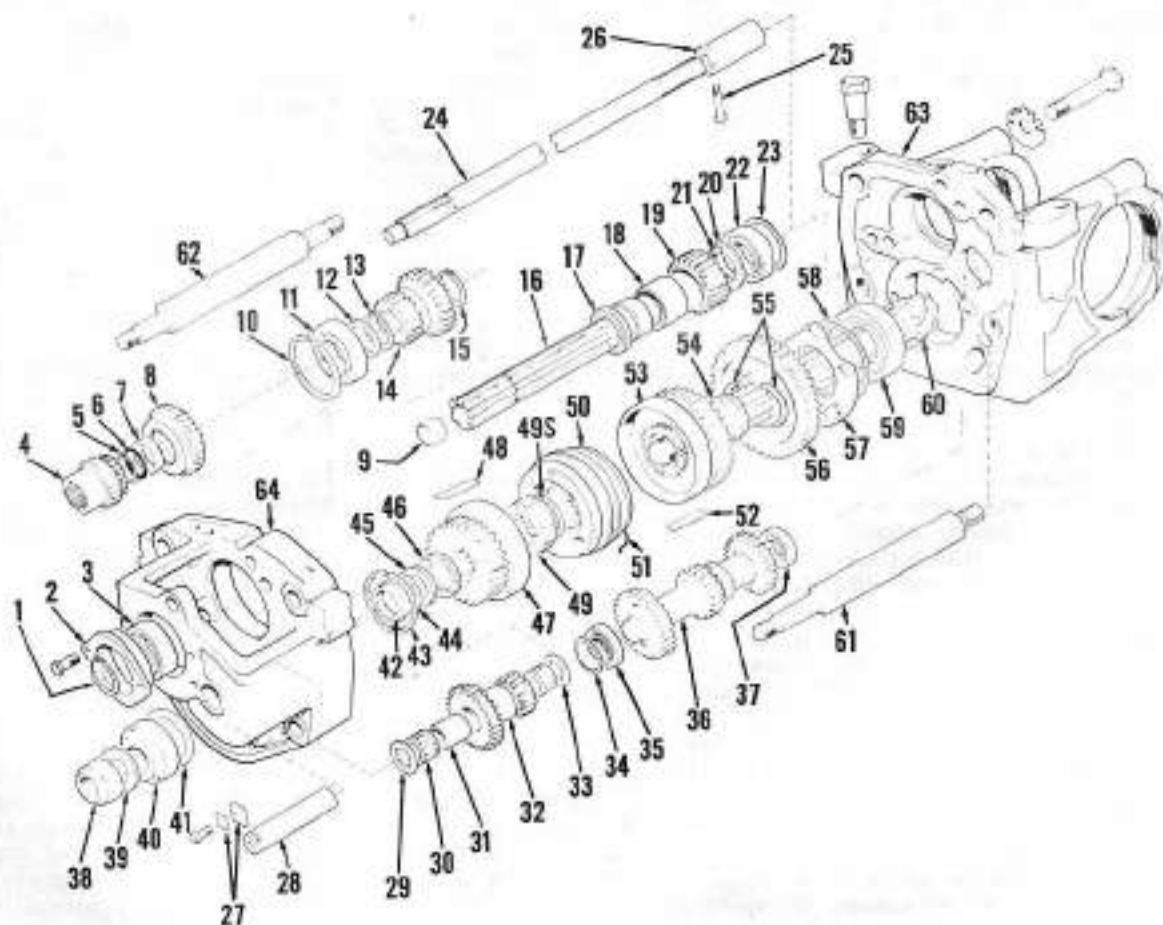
Exploded view of shafts and gears which comprise the six and twelve speed transmissions used in Models 885, 885N and 995. Items 1 through 8 and 27 through 33 are used in twelve speed transmission only.
